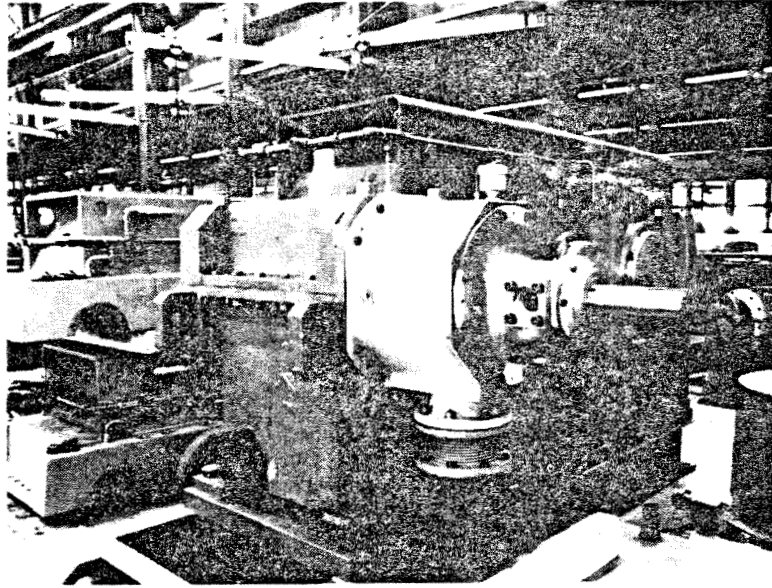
A: HVD with Triple Reduction Parallel Shaft Reducer
